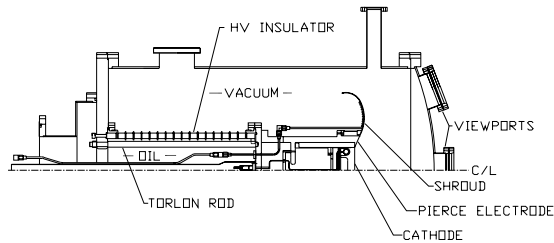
An assembly drawing of the gun and vacuum test chamber.
